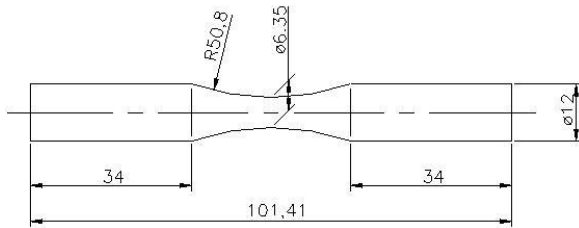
Specimen geometry for biaxial cyclic tension-compression with cyclic torsion tests [8].
